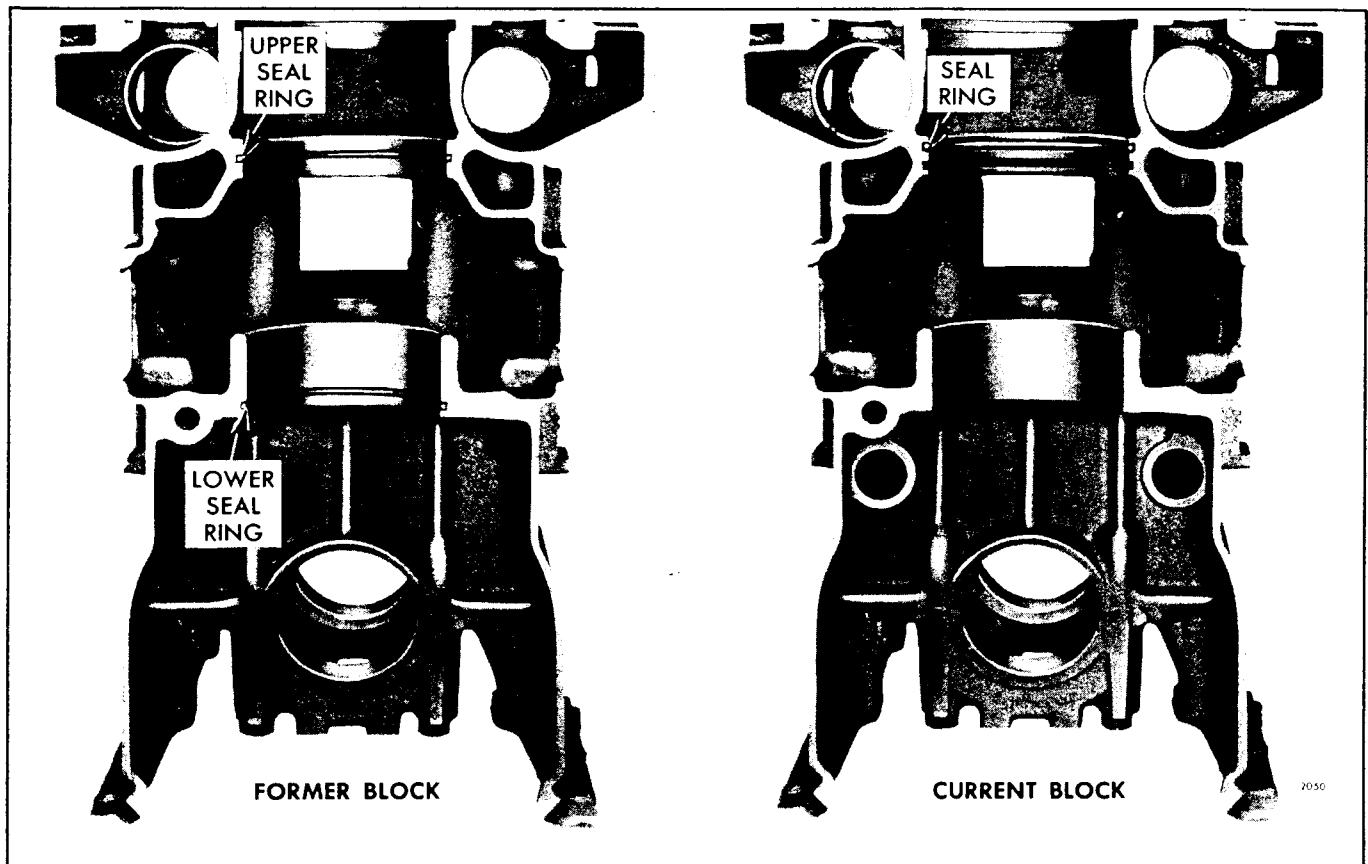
Cylinder Liner Seal Ring Locations in Cylinder Block Bores
